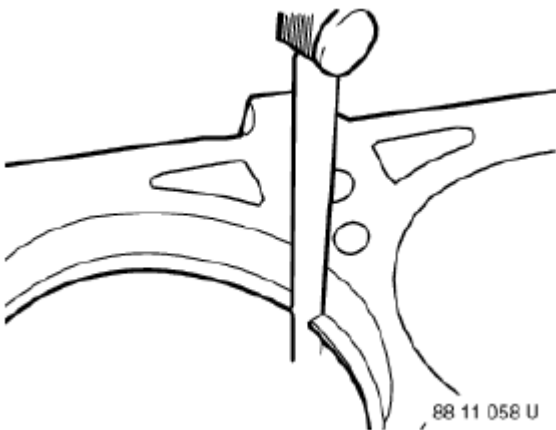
Measuring Ring End Clearance With Feeler Gauge
